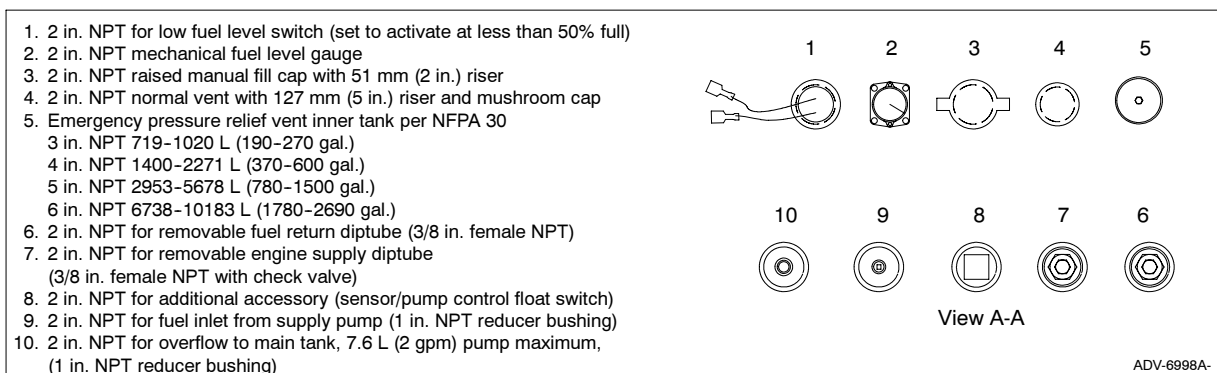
450/500REOVZB Fuel Tank Fittings Top View (Figure 1, View A-A, Left Side of Generator Set)
